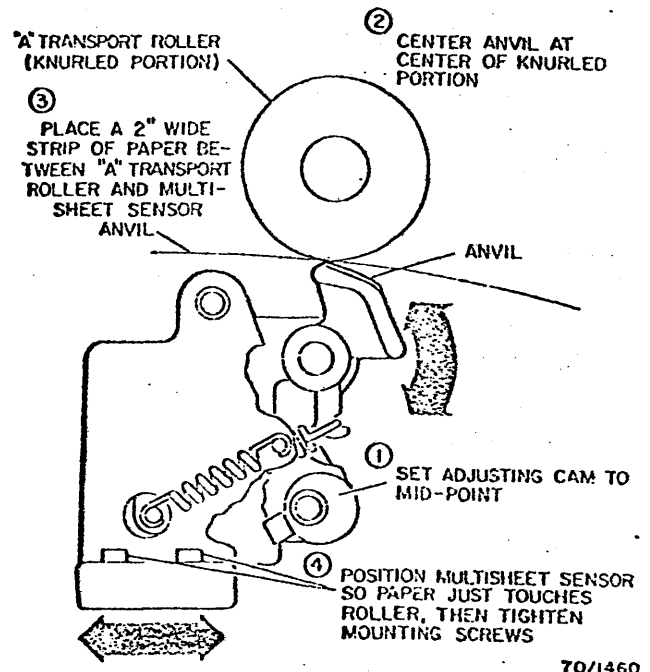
Multi-sheet Sensor (Side-to-Side Adjustment)
